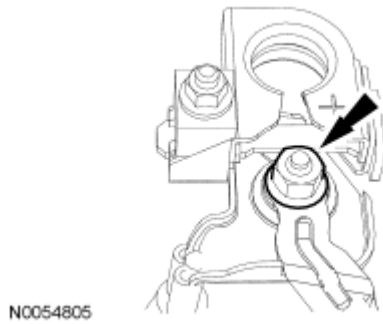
Locating Power Feed To Battery Terminal And Nut
